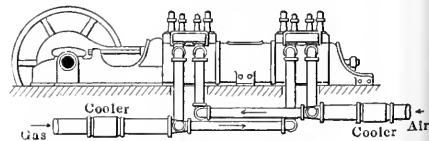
FOUR-STROKE TANDEM ENGINE WITH COOLER
